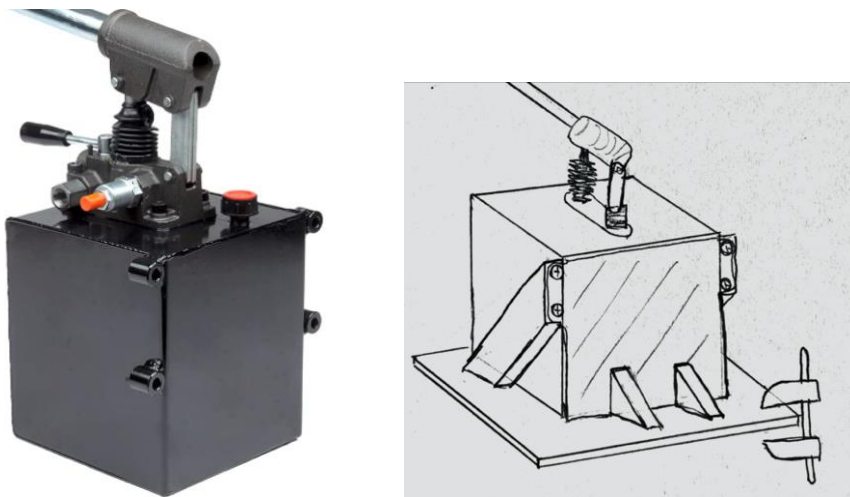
Hydraulic Pump Rear View and Fixture Design Concept
